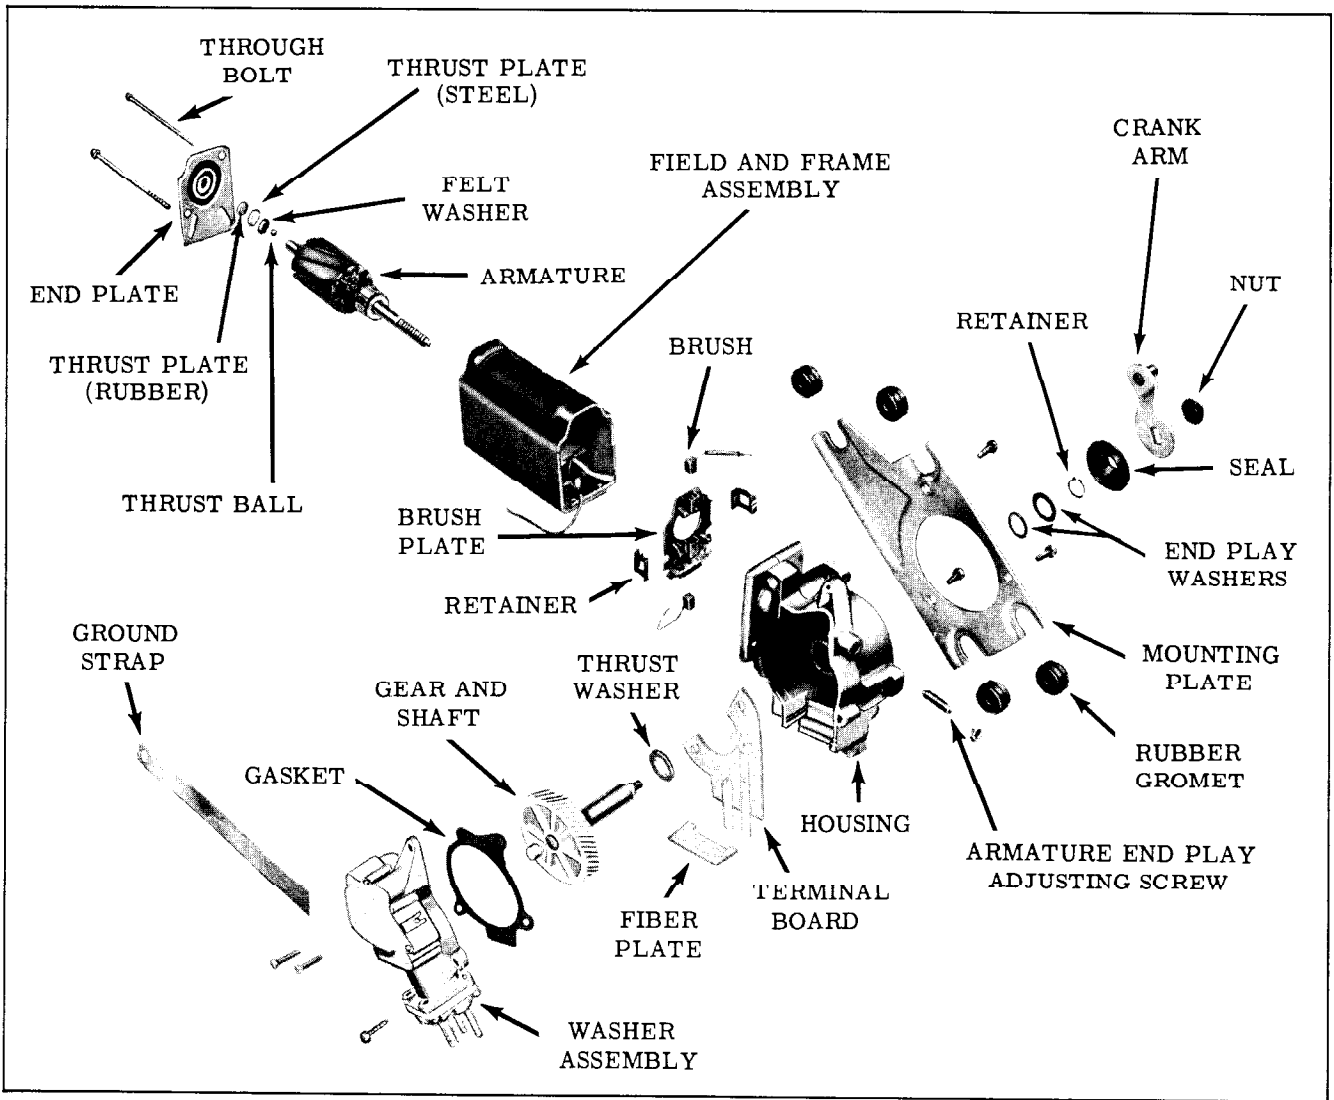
Wiper and Washer Assembly (Single Speed)
